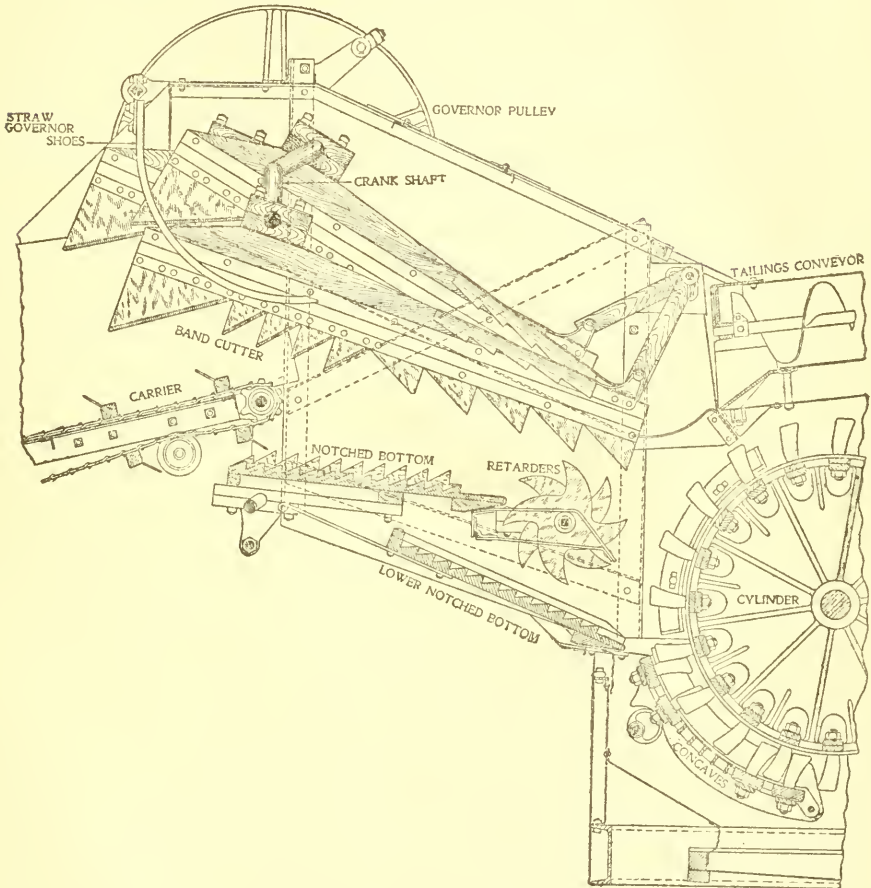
SECTIONAL VIEW OF CASE FEEDER.
